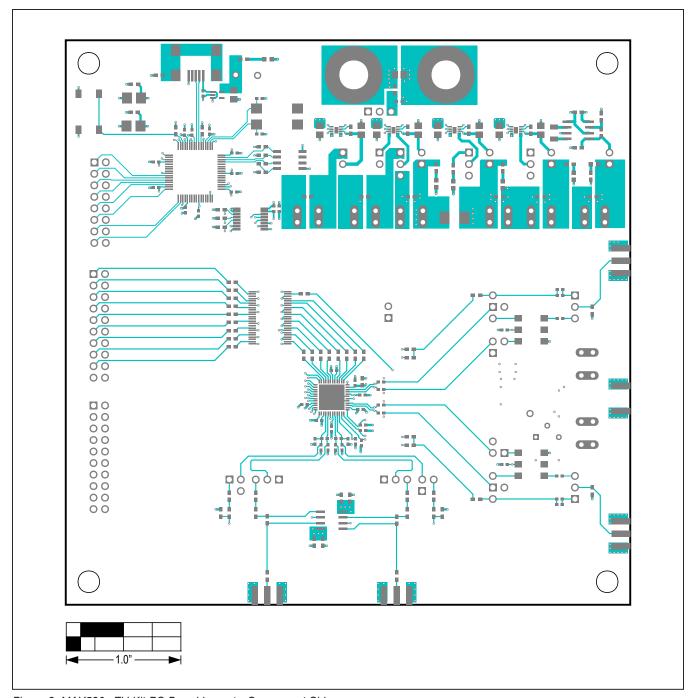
MAX586x EV Kit PC Board Layout—Component Side
